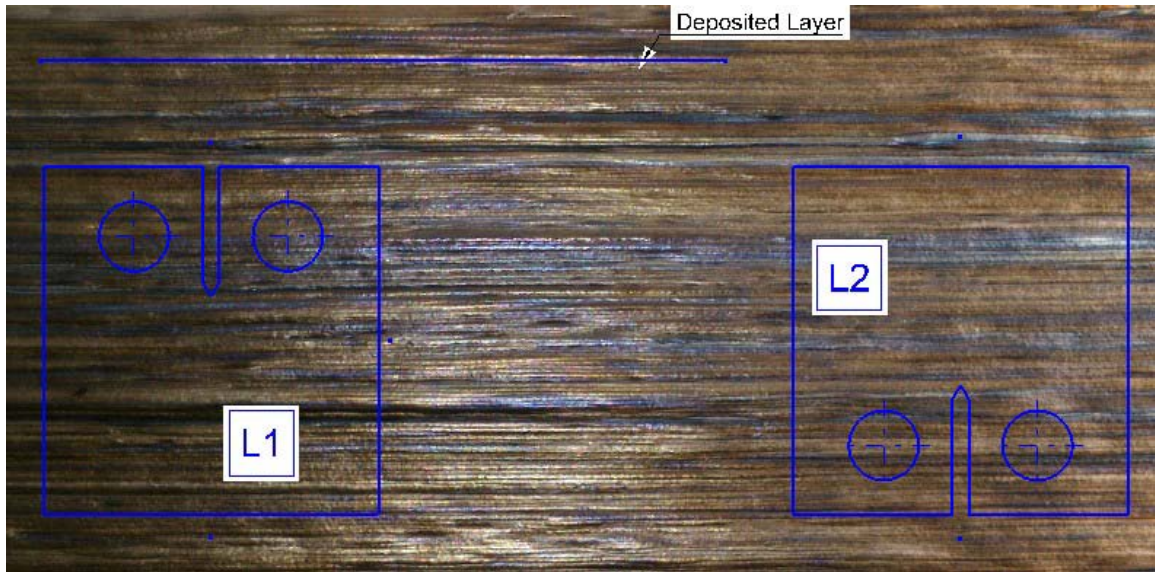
Locations of L-T specimens as they were cut off from the “wall”; crack in L1 specimen was from the wall’s top to bottom, crack in L2 specimen was from the wall’s bottom (near the substrate plate)
